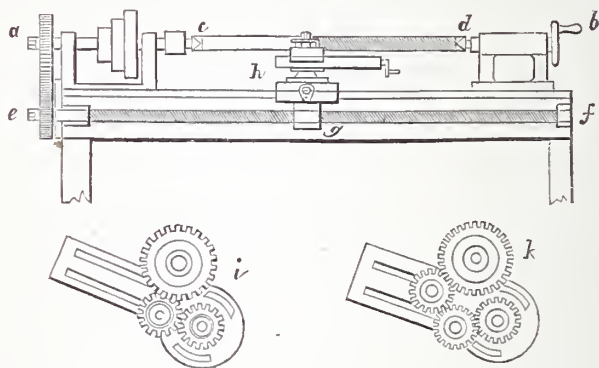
represents a small screw-cutting lathe of the usual construction.
